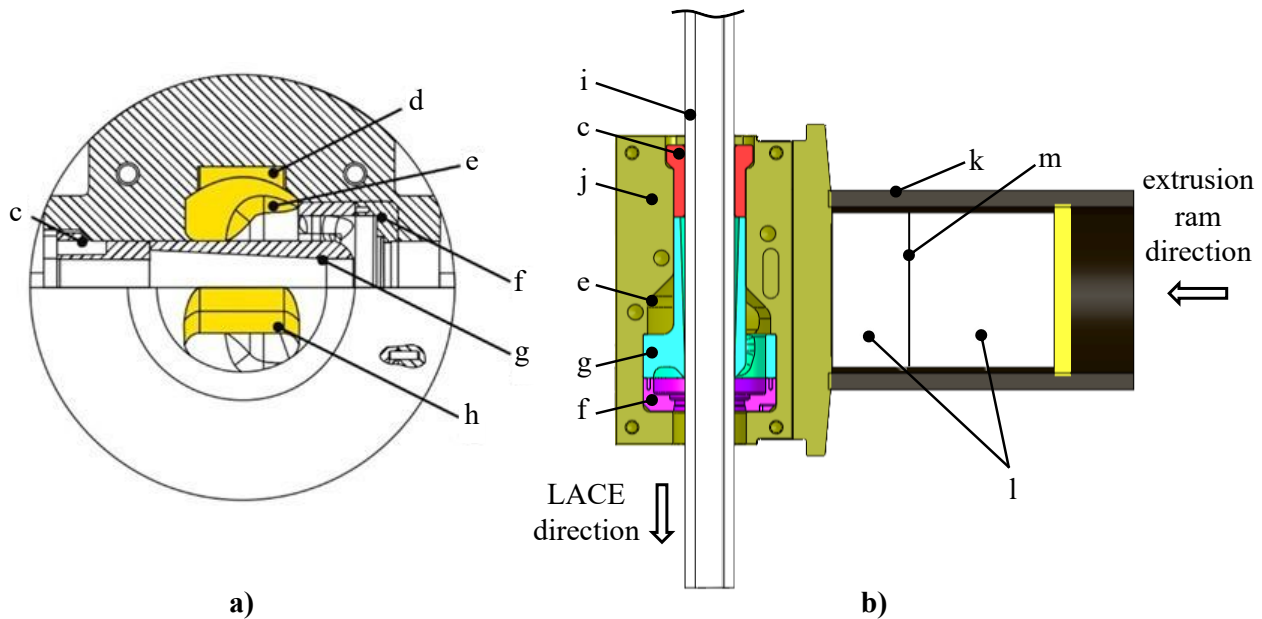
Illustration of the LACE tool; (a) Schematic illustration with sectional plane lengthwise through the tool [13], with c: clamping cover, d: pocket, e: deflection, f: die, g: mandrel part with three support arms, h: inlet (the geometry of the inlet and deflection are highlighted); (b) schematic illustration of the concept for the 10 MN extrusion press in longitudinal section with i: reinforcing element (titanium grade 5 tube), j: die housing, k: container, l: EN AW-6082 split billet, m: iron foil.
